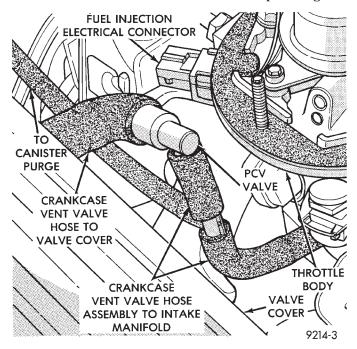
Vacuum Hose from Intake Manifold to PCV Valve
